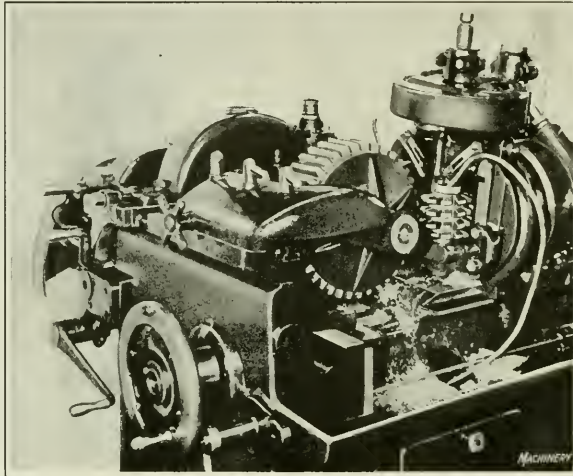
Cutting Tractor Gears on Hobbing Machine having Horizontal Work-spindle
